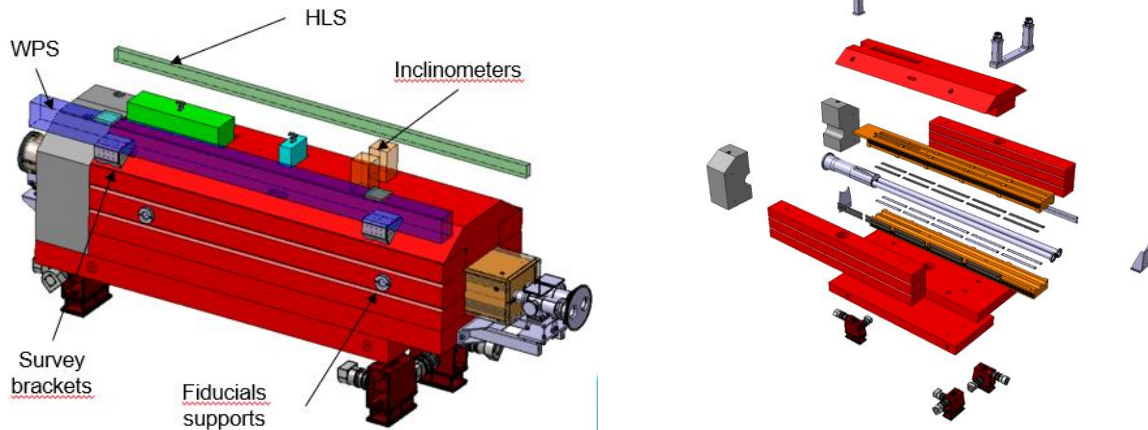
Left: 3-D drawing of the TAXN and its surrounding equipment. Right: Exploded view of the TAXN. Y chamber (grey) is surrounded by the Cu absorber (orange) embedded onto a heating jacket (not shown) for bake-out purposes. This subsystem is itself enclosed in the TAN steel shielding (red). Ancillaries as feet (remotely aligned), heating strips, cooling pipes, alignment supports, and marble blocks are also shown. The top lid is being redesigned to be compatible with the BRAN luminosity detector and Zero Degree Calorimeter (ZDC).
